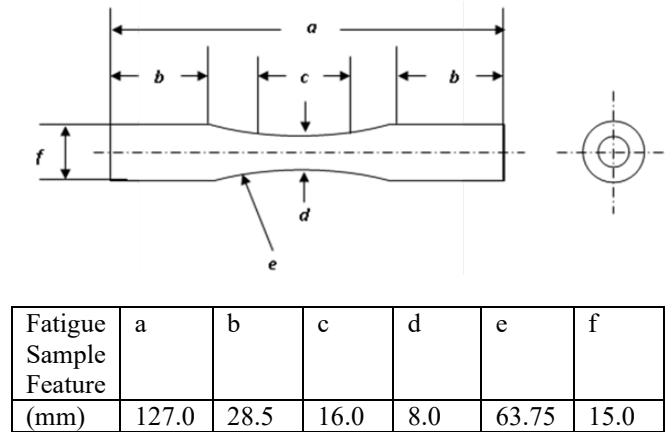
Dimensions of the Fatigue test sample fabrication as outlined in ASTM E 466-96.
